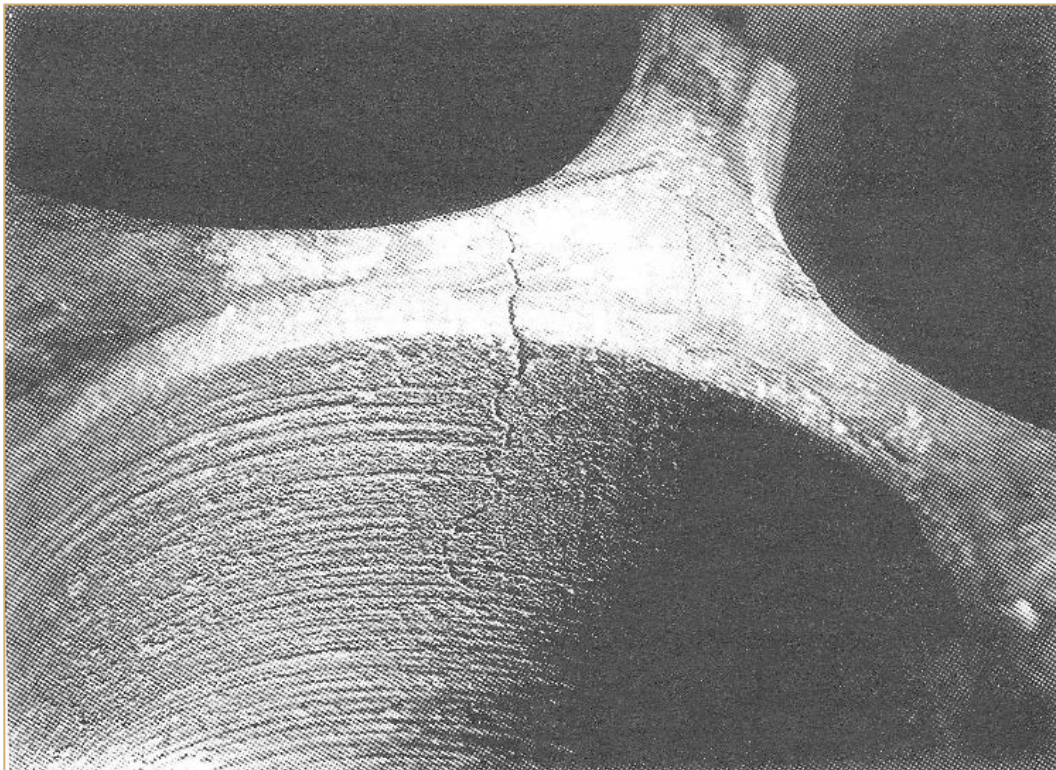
View of tube spacer plate cracking [Mousset, 1990].
